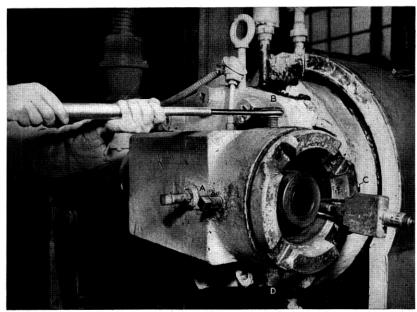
Core tube and die assembled in extruder head and die adjusting screws.
